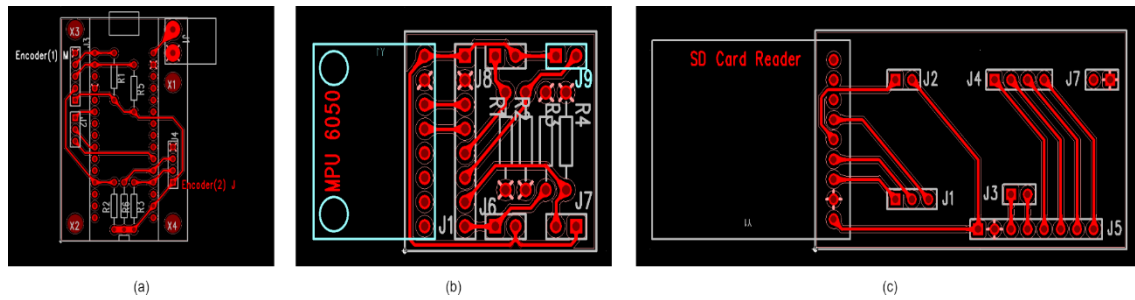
Circuit Boards: (a) Bottom Shield – Connects the encoders and the motor driver to the STM board; (b) Foot Board – Connects the IMU and the FSRs to the Top Shield; (c) Top Shield – Connects the Foot Board and the SD card to the STM board
